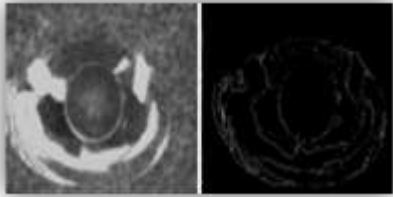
Diamond abrasive drilling; spindle speed 8,000 rpm and feedrate 5 mm/min.
